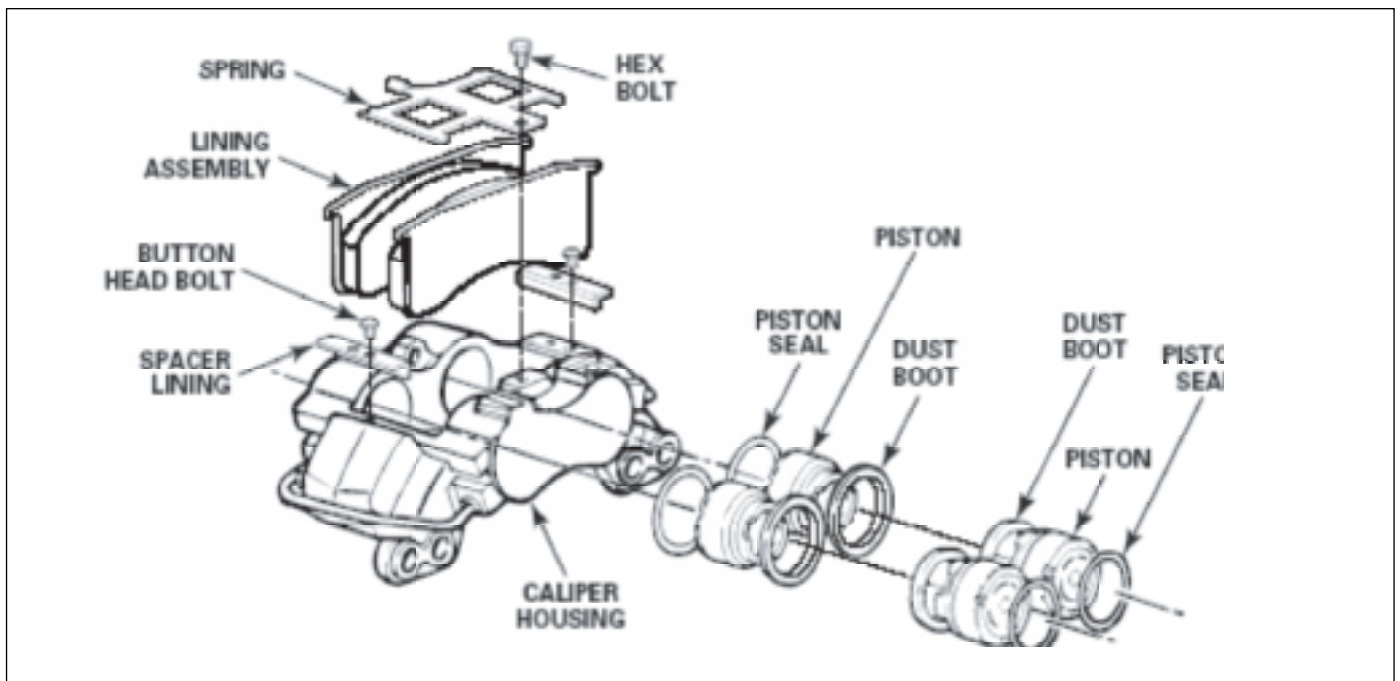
Exploded view of Quadraulic caliper assembly.
